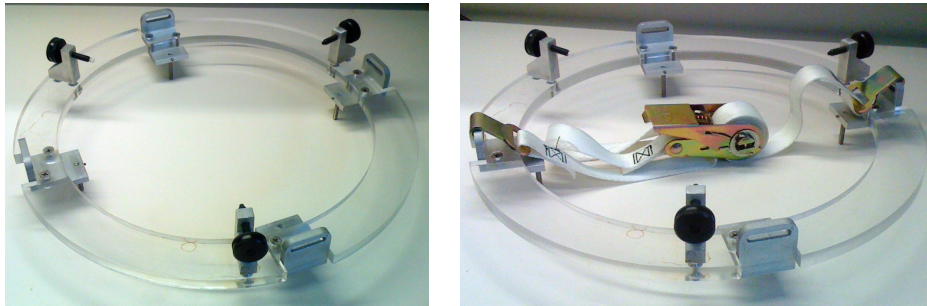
Mounting flange, four hooks for the straps, three screws to center
